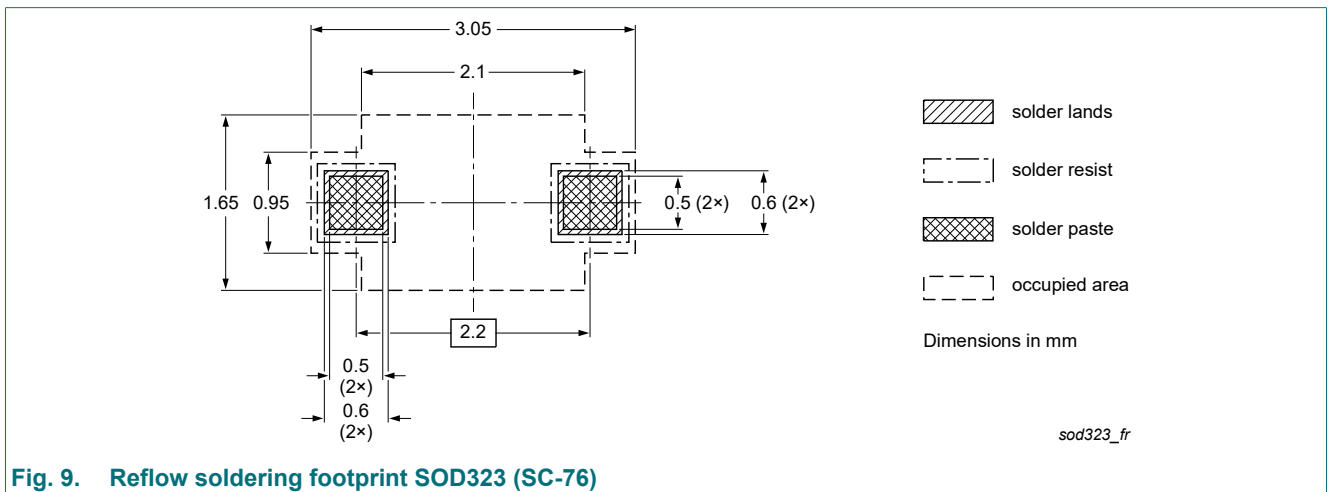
Reflow soldering footprint SOD323 (SC-76)
